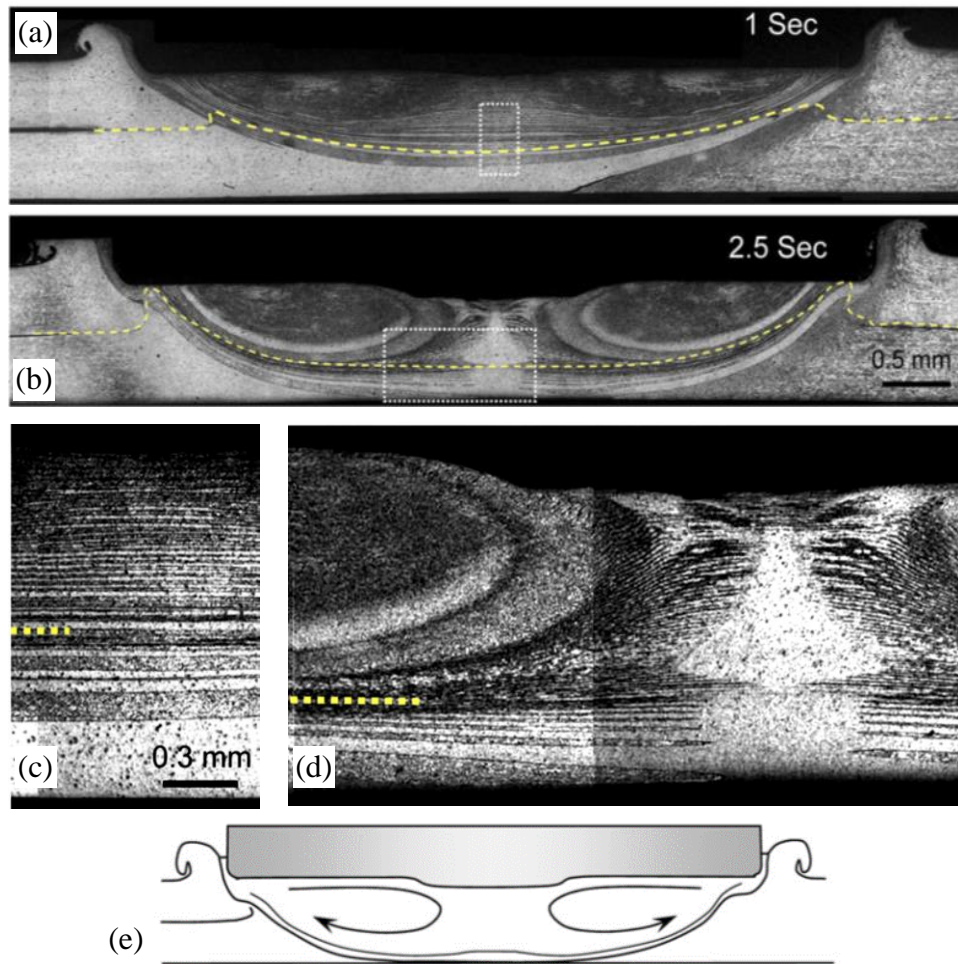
Material flow observed with a pinless tool from welds produced with the upper and lower sheets split through the weld centre into dissimilar copper content alloys; cross-section views weld formation with a 0.2-mm plunge and a dwell time of: (a) 1.0 s and (b) 2.5 s. (c) and (d) show magnified views from regions highlighted with white rectangles in (a) and (b) respectively, and (e) provides schematic diagram indicating the material flow. The dashed lines indicate the position of the weld line determined by X-ray tomography (Bakavos, et al., 2011).
